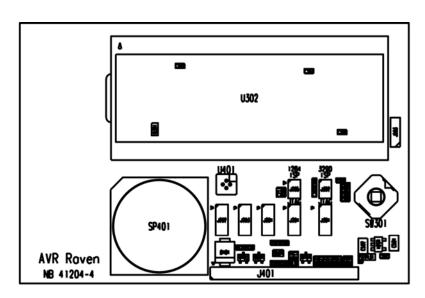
Assembly drawing AVRRAVEN - back view.
